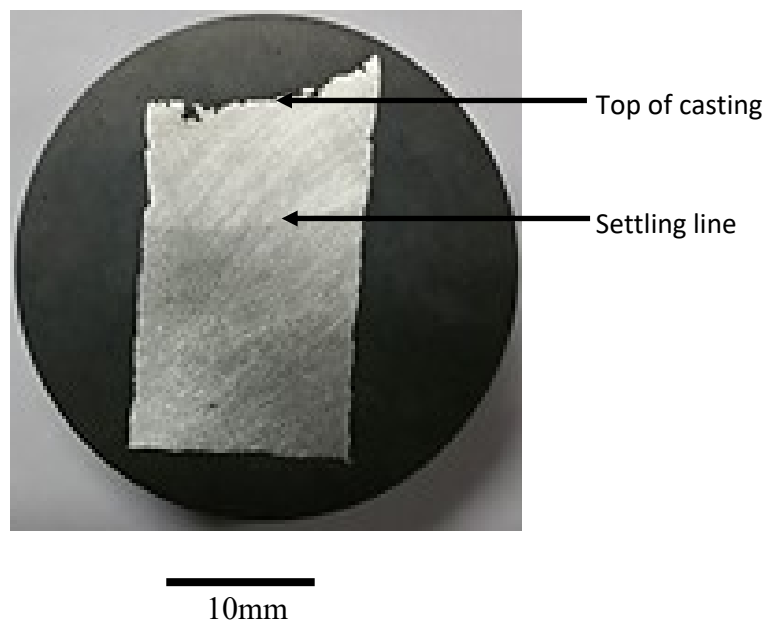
Mounted section from the top of a settled casting showing the settling line
